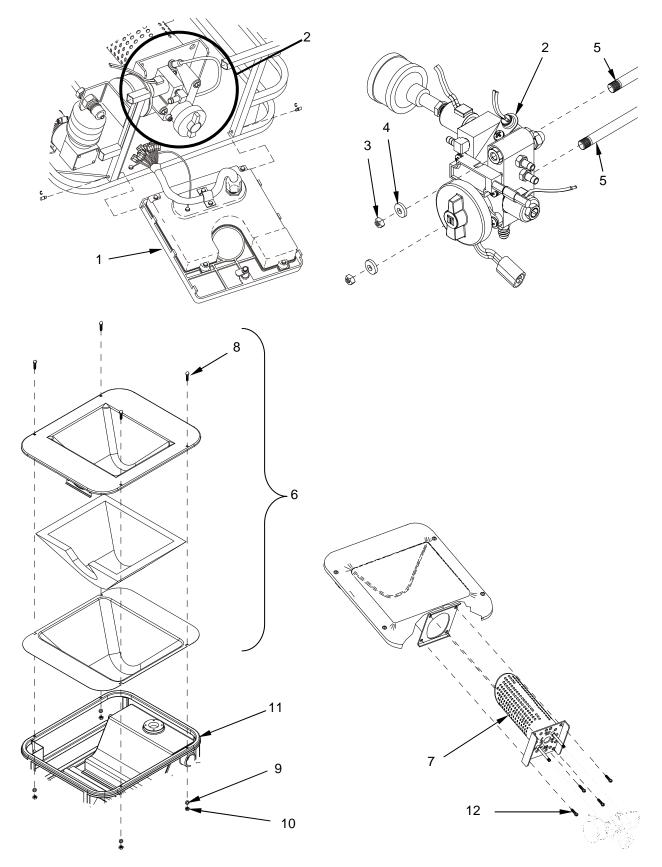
Replace the Burner Assembly and Reflective Heat Shield Assembly.
